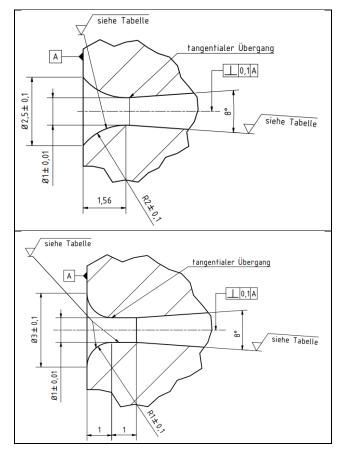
Technical drawings of the nozzle with 1 mm diameter for the toroidal shape (top) and cylindrical shape (bottom).
